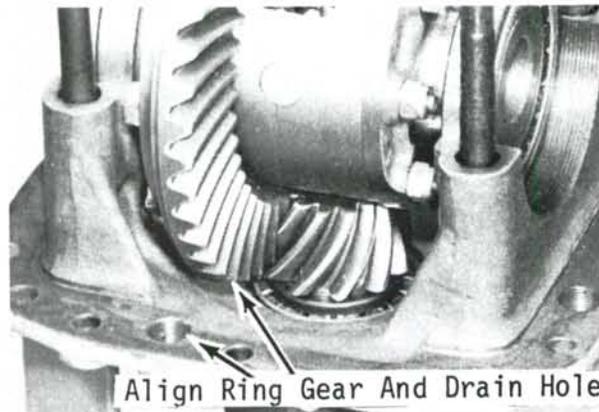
When installing differential unit in carrier, make sure ring gear is on same side as drain hole in carrier.
